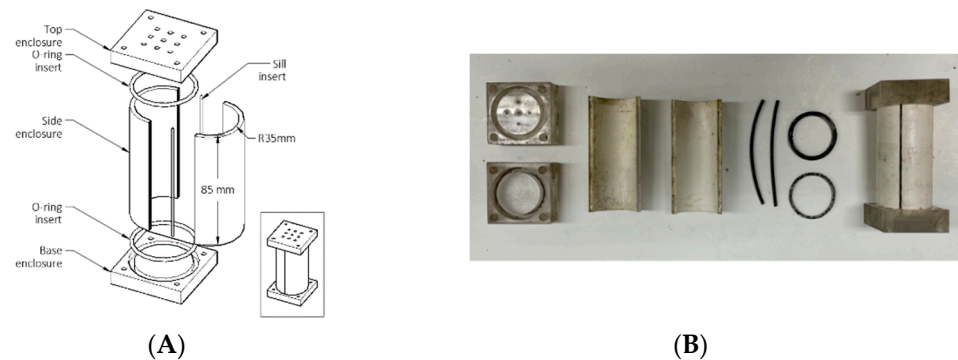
UCS mold assembly. (A) Mold schematic. (B) Mold photograph.
